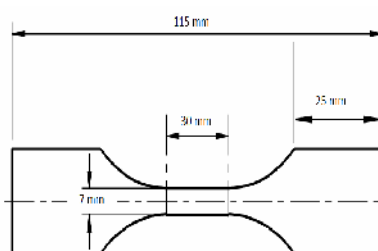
Dimensions of dumbbell specimen for tensile testing of composite material.
